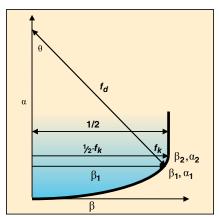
This two-dimensional view of the tank head is shown using dimensionless parameters
